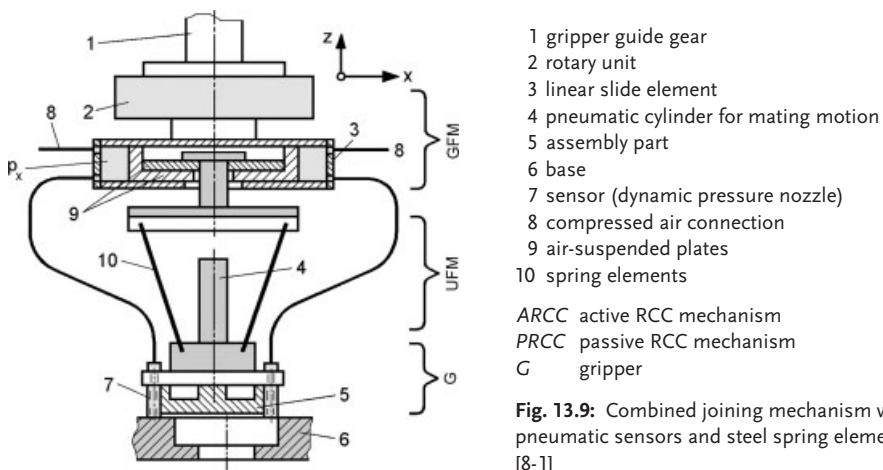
Combined joining mechanism with pneumatic sensors and steel spring elements [8-1]
